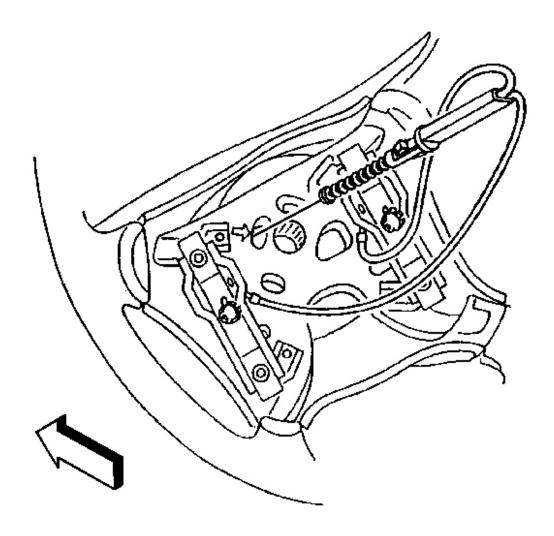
View Of Horn Plunger At Steering Column Courtesy of GENERAL MOTORS CORP.
